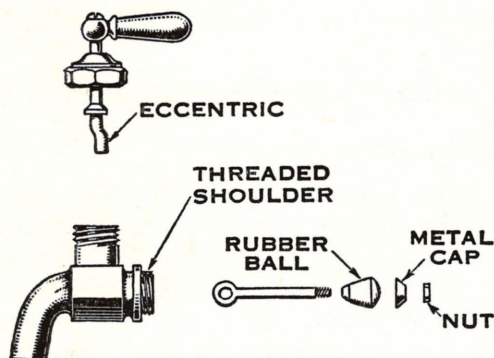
The rubber ball washer and the packing can be replaced after the faucet has been removed at the shoulder
